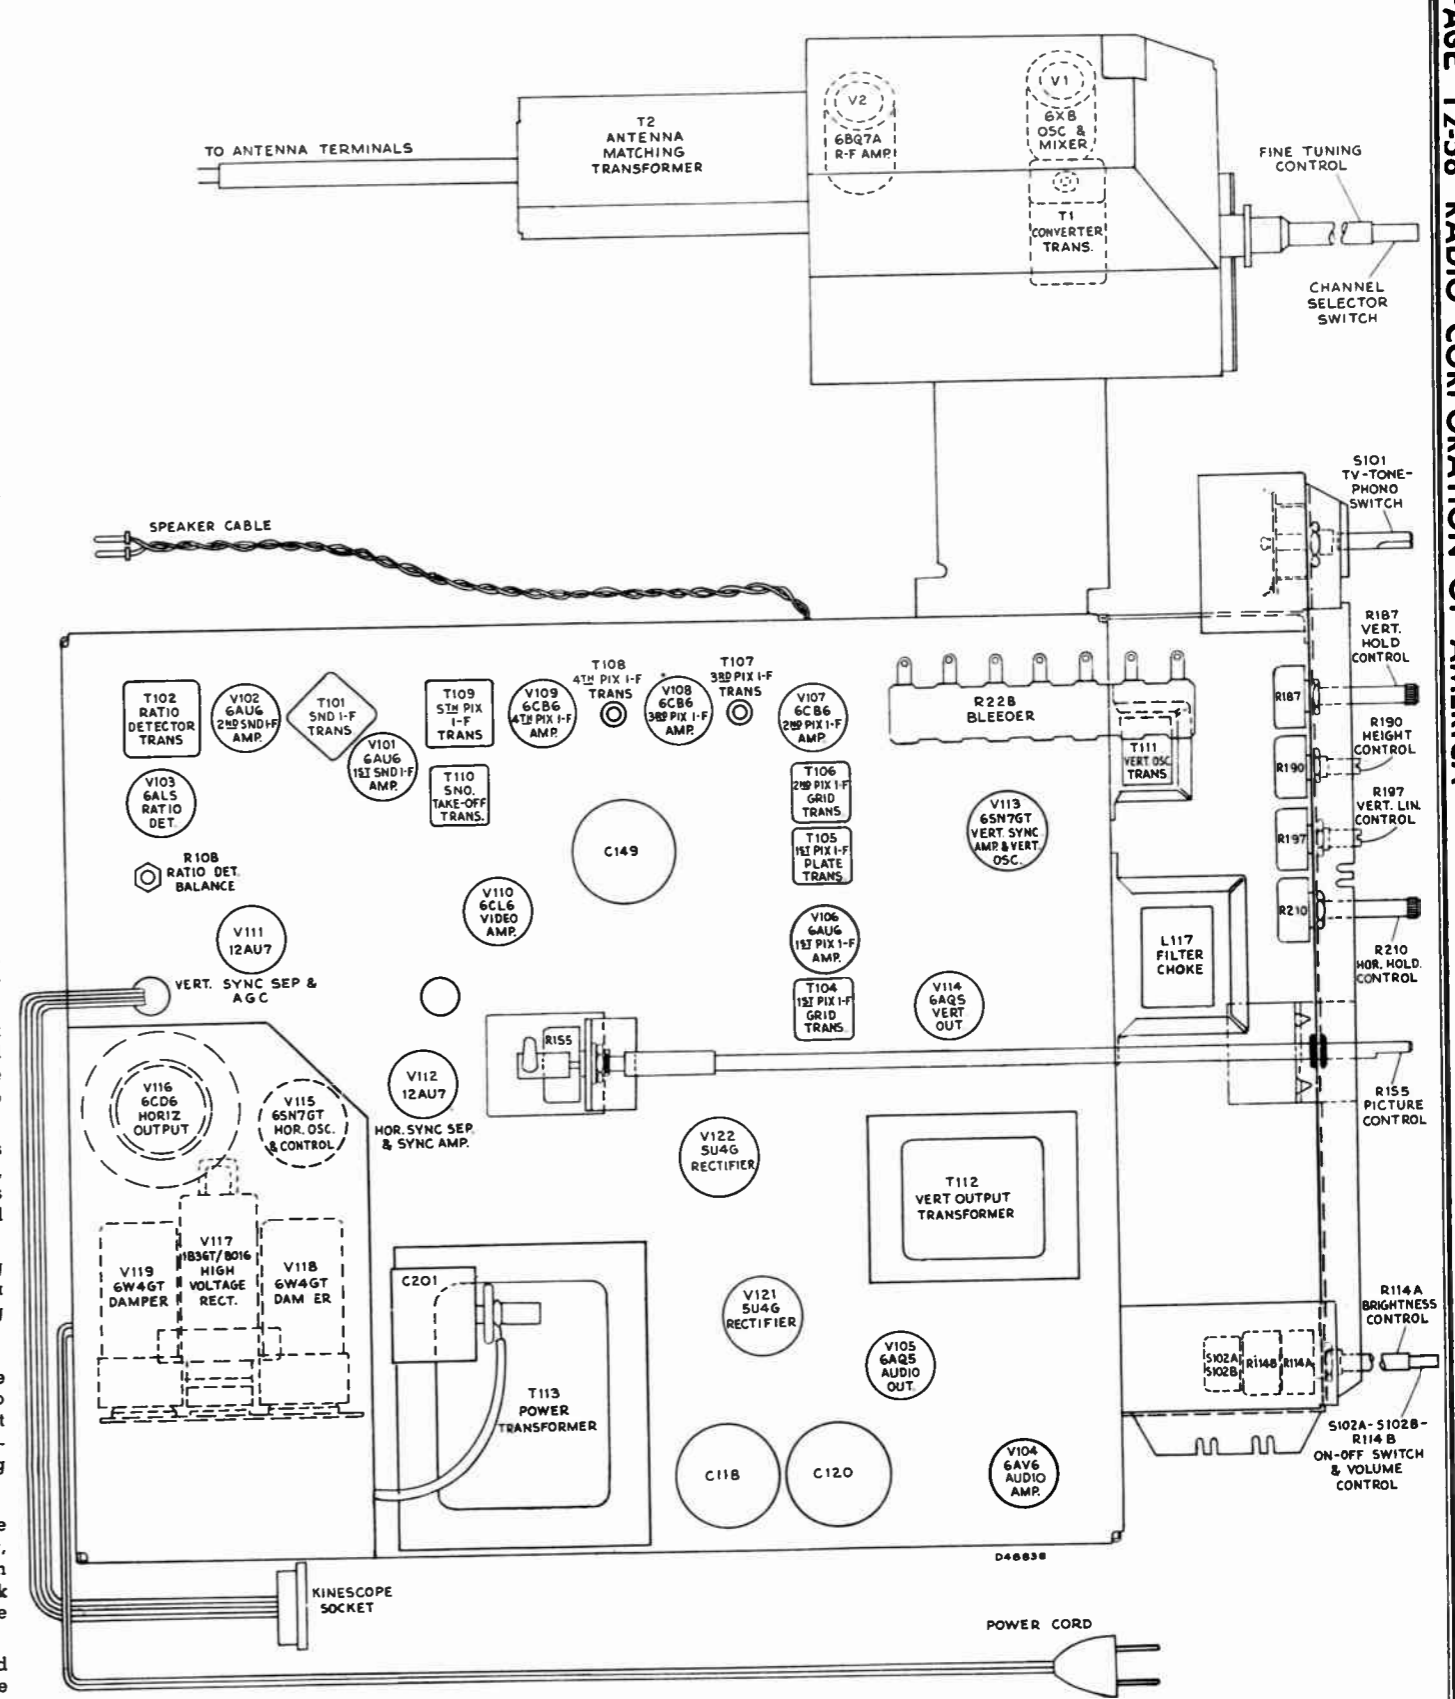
Chassis Top View (shown with KRK11B Tuner)
